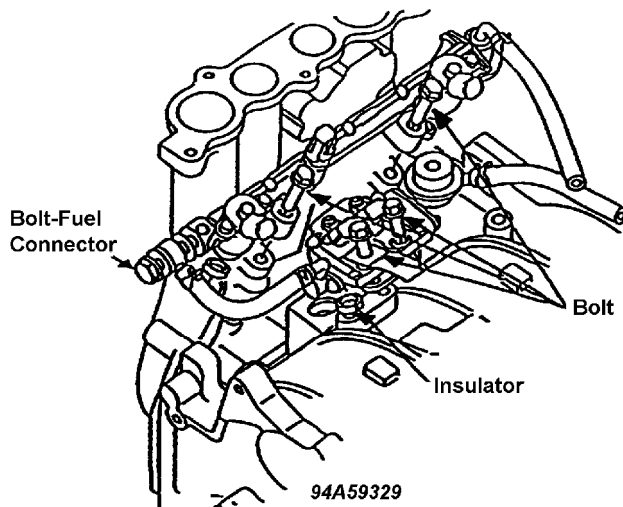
Removal of Primary & Secondary Fuel Distributor & Insulator
